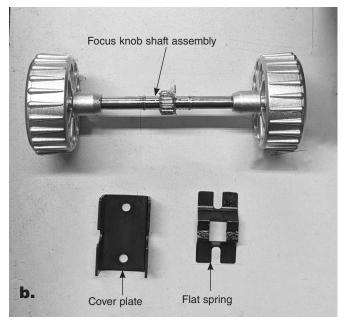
There is a small flat spring intended to maintain tension of the focus knob assembly shaft against the rack gear of the drawtube. Because this connection is greased you may find the flat spring stuck to the focuser housing as shown in Figure 2 or in the cover as shown in Figure 3a. Carefully remove it and set it aside. It will help to take note of the orientation of the spring as you will need to set it back in the same position when reassembling.
